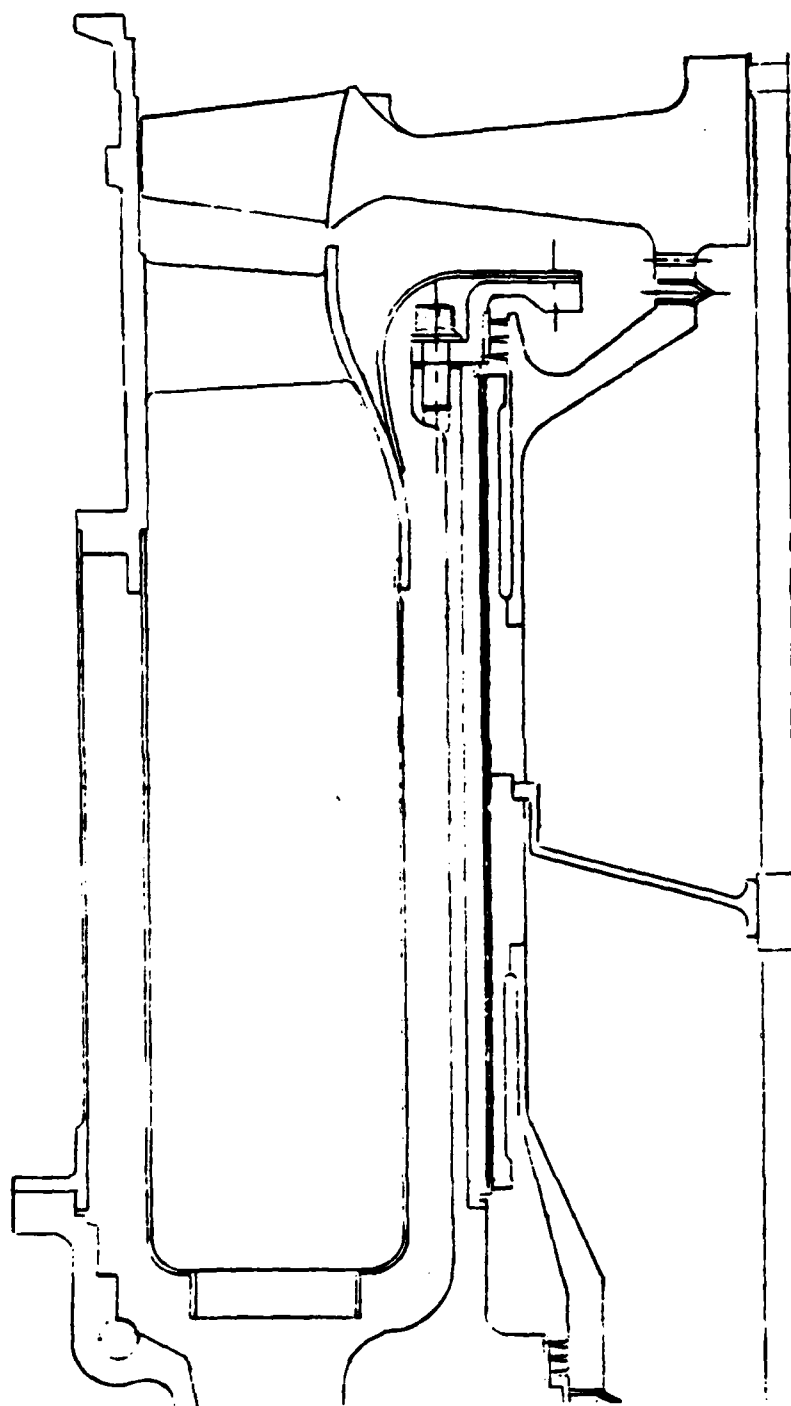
TJE331-1029 Turbine End Foil Bearing, 4.5-Inch Journal.
